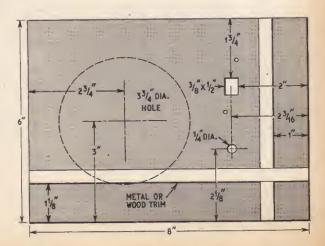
Front panel cutting and drilling details. Suitable material is  $\frac{1}{8} in$  hardboard
